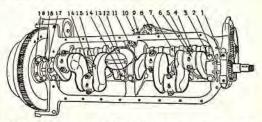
Crankcase with crankshaft in place (a six-cylinder engine as an example). (1) front support; (2) oil ducts to carry oil back in crank case; (3) crankshaft front bearing cap; (4) connecting-rod lock nut; (5) connecting-rod boit; (6) connecting-rod cap; (7) cam; (8) ignition distributor (Delco); (9) and (10) set screws for distributor; (11) oil pipe from pump to distributing tube; (12) oil-pump screen; (13) center bearing cap; (14) center-bearing lock screw; (15) crankshaft; (16) connecting-rod shims; (17) rear-bearing cap; (18) rear-bearing lock screw; (19) crankshaft fly-wheel flange.
